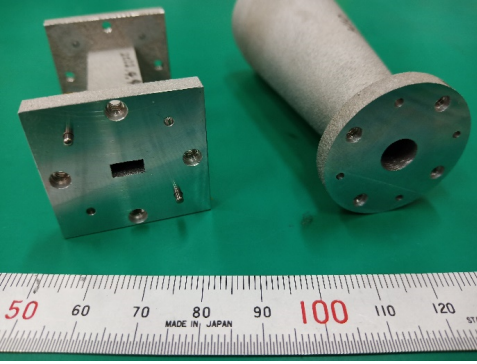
The flange parts of both the WR-22 waveguide transition and the fabricated corrugated horn, which were post processed by milling machine.
